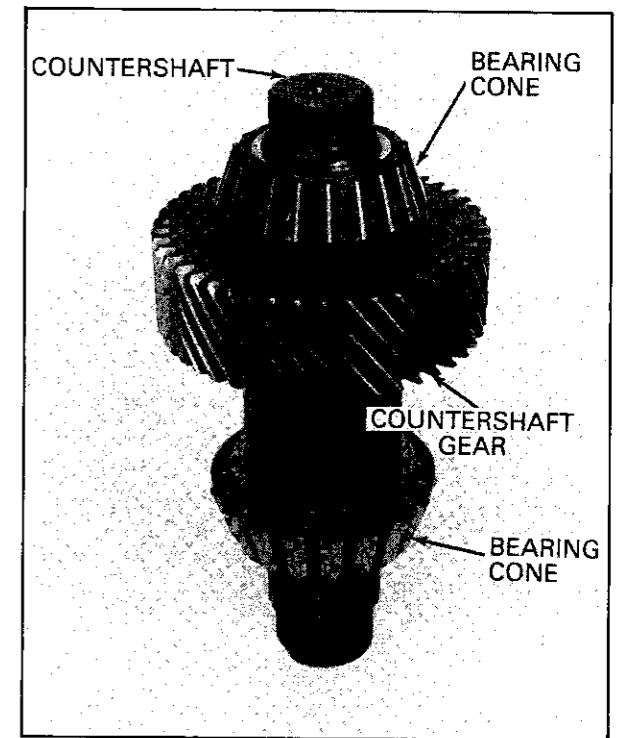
COUNTERSHAFT FRONT BEARING CONE INSTALLATION
